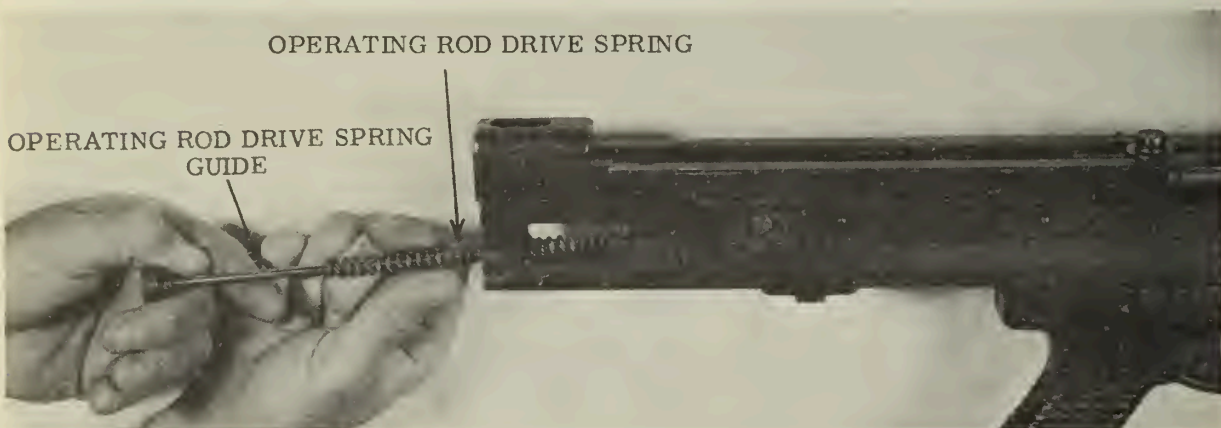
Replacing the Operating Rod Drive Spring and Guide.
